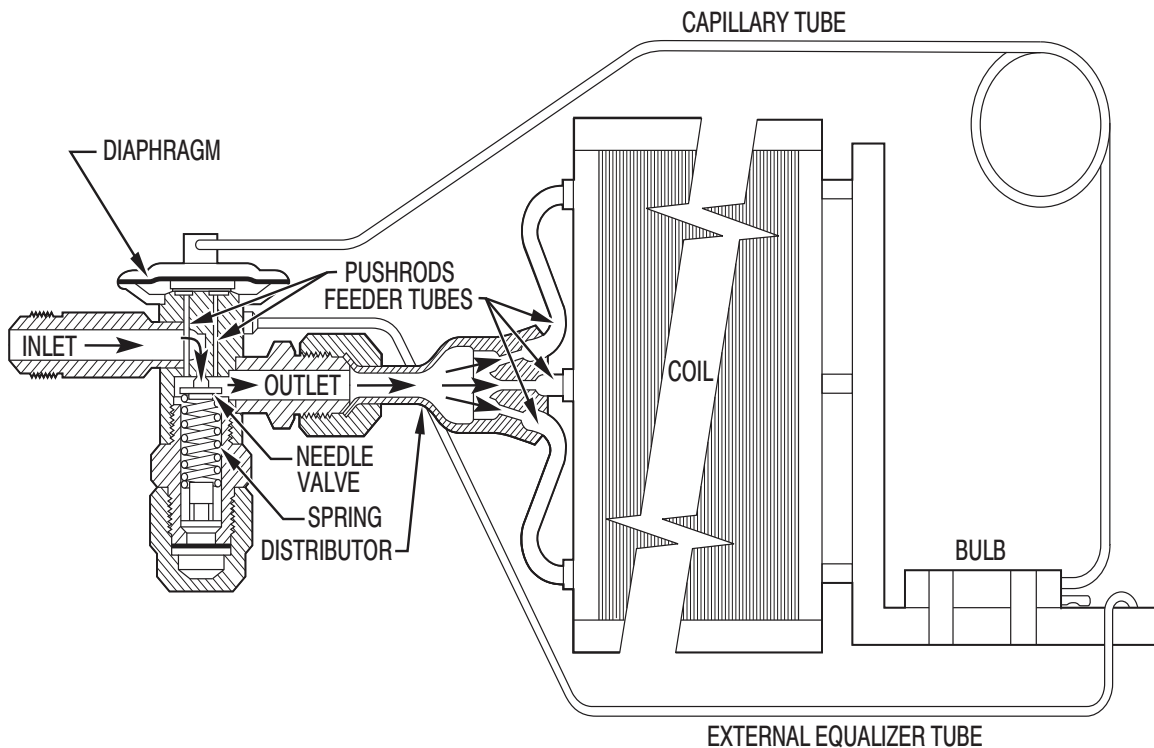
Thermostatic Expansion Valve (TXV) Operation
